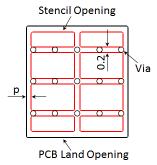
Stencil Openings Shall not Cover Via Areas If Possible (Dimensions are in mm)
